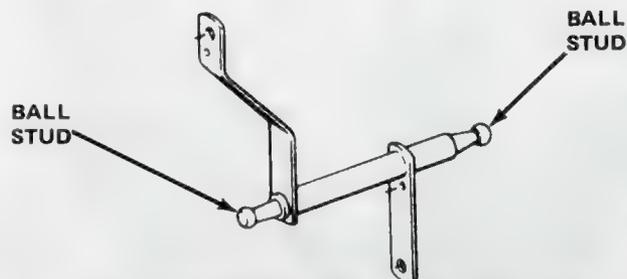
Six-Cylinder Clutch Bellcrank Pivot Ball Studs
